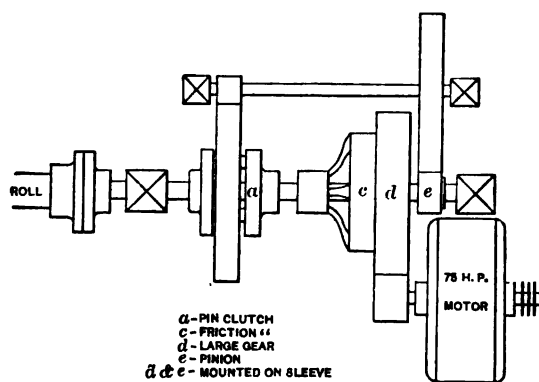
WEB CALENDER—MECHANISM FOR ONE-MOTOR DRIVE.
